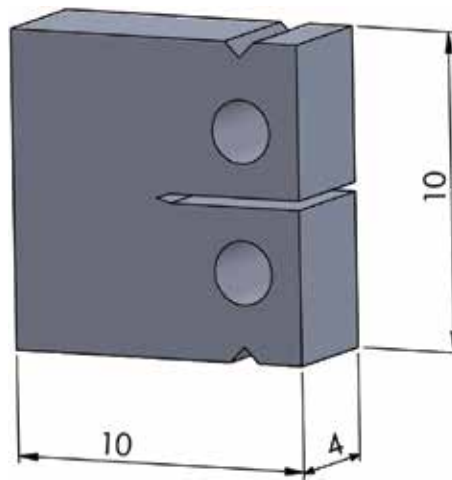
Layout of mini-0.16 T-CT specimens that can be extracted out of the broken halves of Charpy specimens and its overall dimensions.
